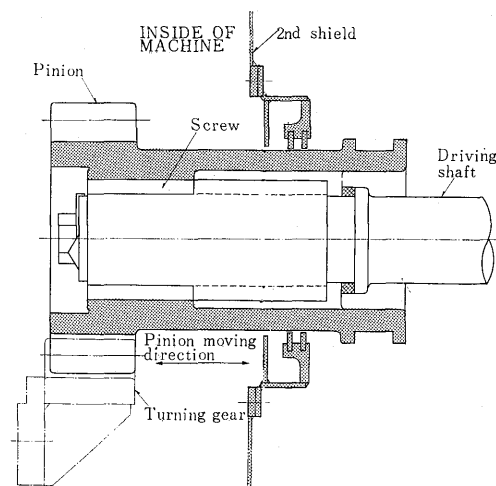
Explanatory view of 2nd shield and pinion for turning
